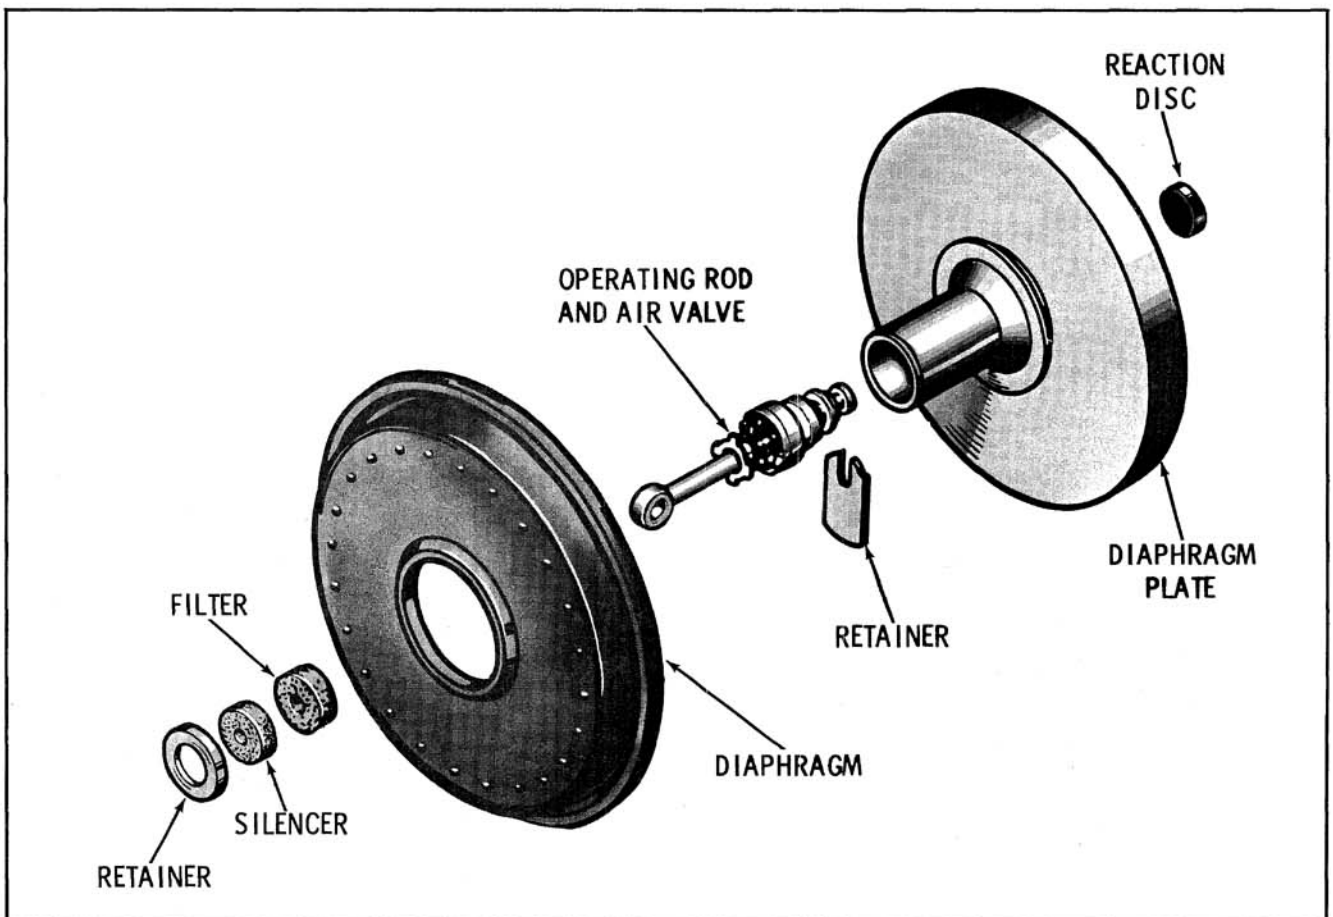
Disassembly of Air Valve and Diaphragm
